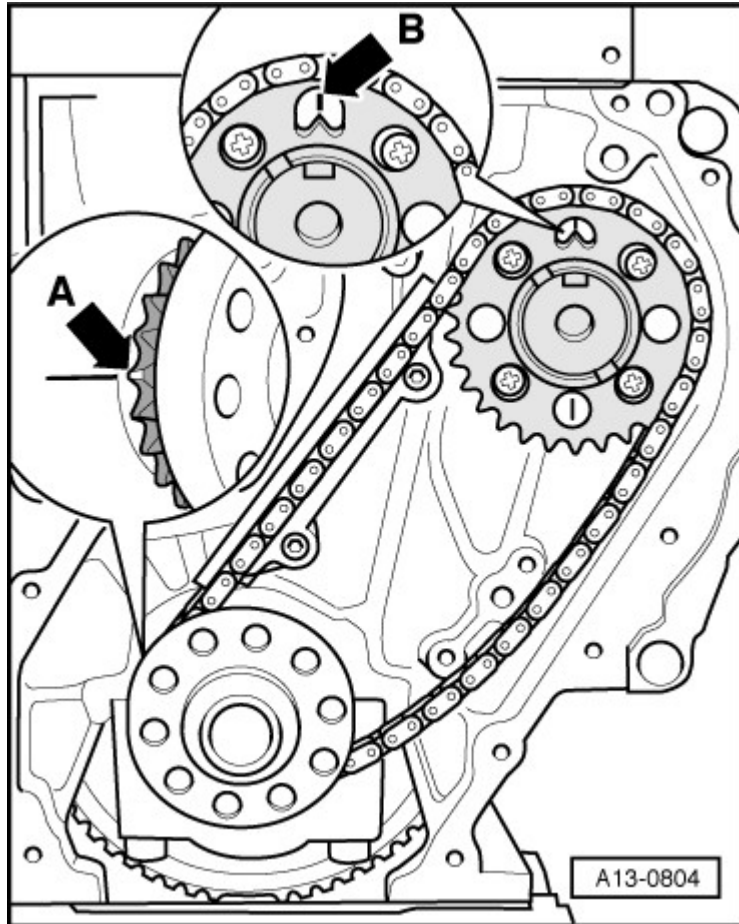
Identifying Large Sprocket Installed Into Timing Chain With Tab Aligned To Mark On Cylinder Block
